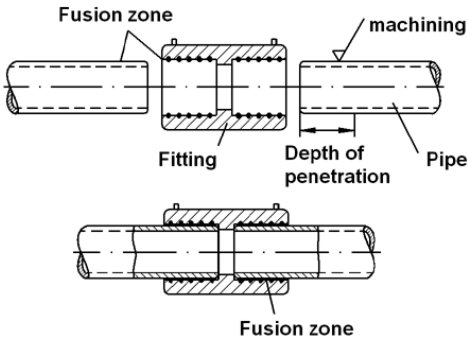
Electro-socket welding of a coupler (principle).
